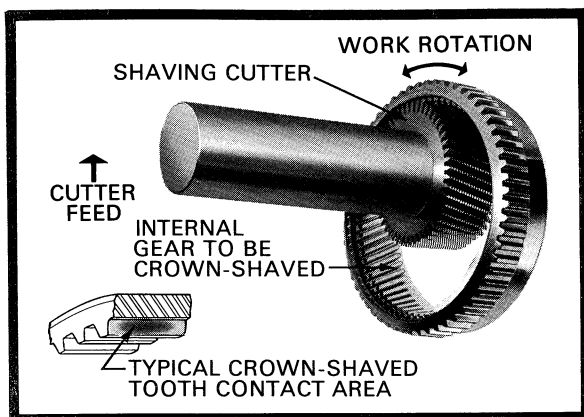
Motions of internal work gear and rotary shaving cutter for plunge-feed, crown-shaving.
